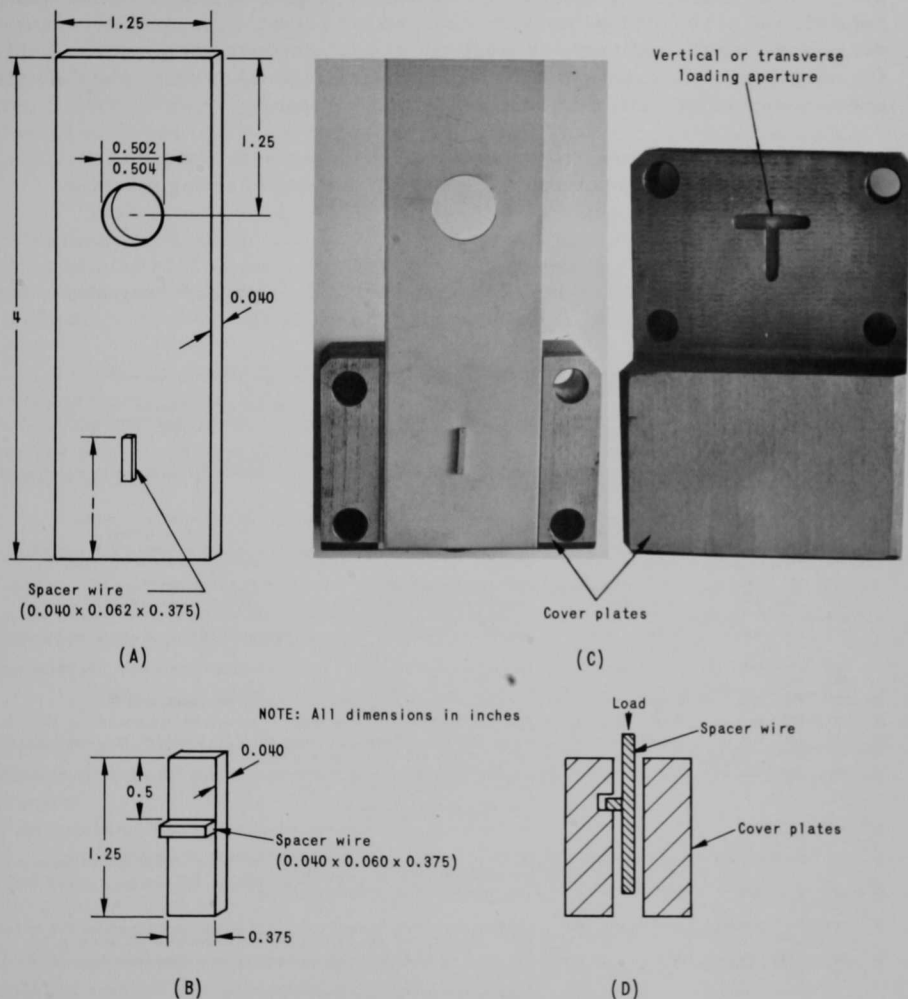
Typical Shear Test Specimens and Postbrazing Loading Fixtures
